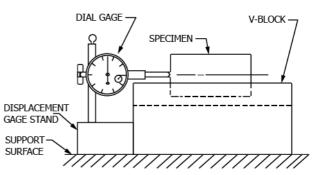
Assembly for Determining the Flatness and Perpendicularity of End Surfaces to the Specimen Axis (FP1)
